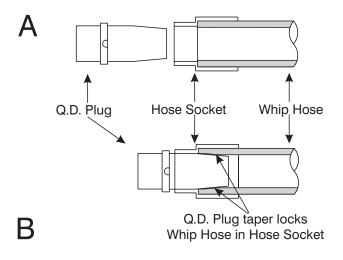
Thread Tapered End of Q.D. Plug into Hose Socket.
